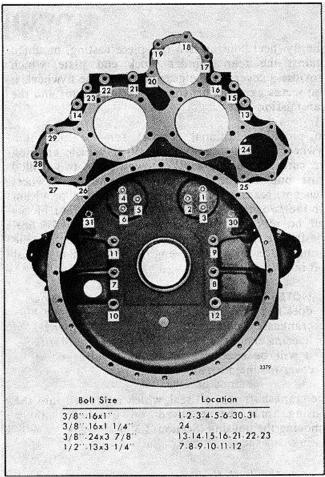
Flywheel Housing Bolt Size and Tightening Sequence (Operation 1)
